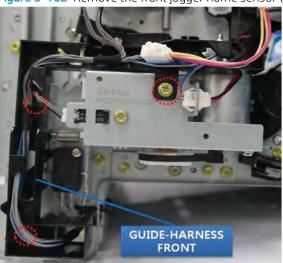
Remove the front jogger home sensor (8 of 15)
